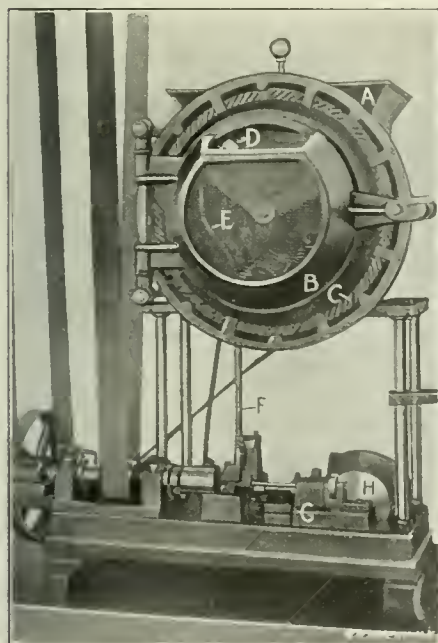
Automatic Trimming Machine for Trimming the Shells to Length
